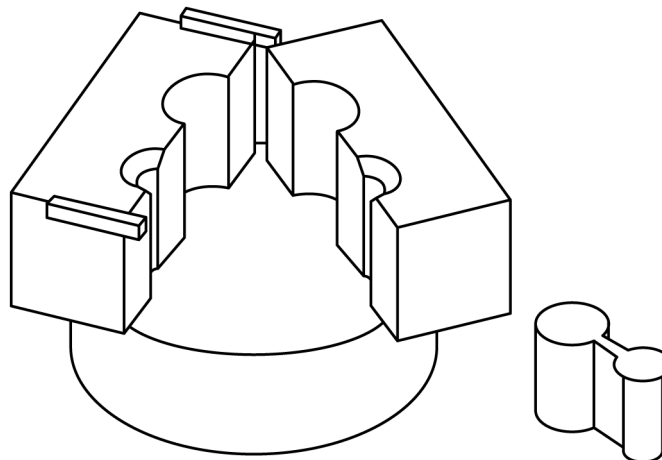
Type U Mold—U-Block Mold—U-Block Mold and Sample
